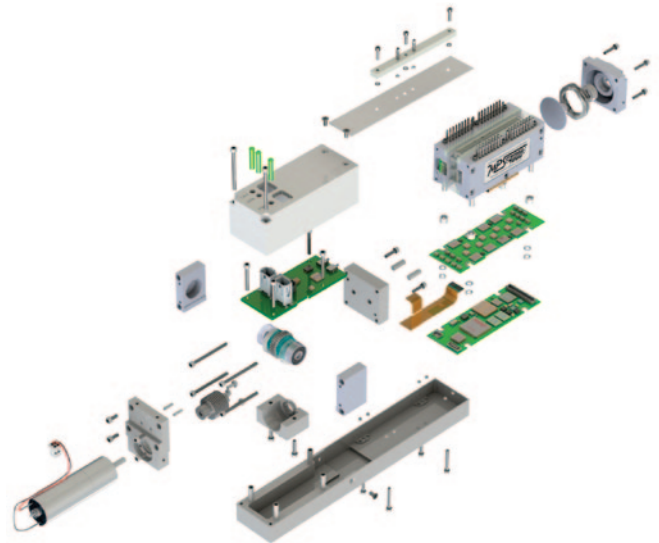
ELECTRONICS EXPLODED VIEW - EPX
